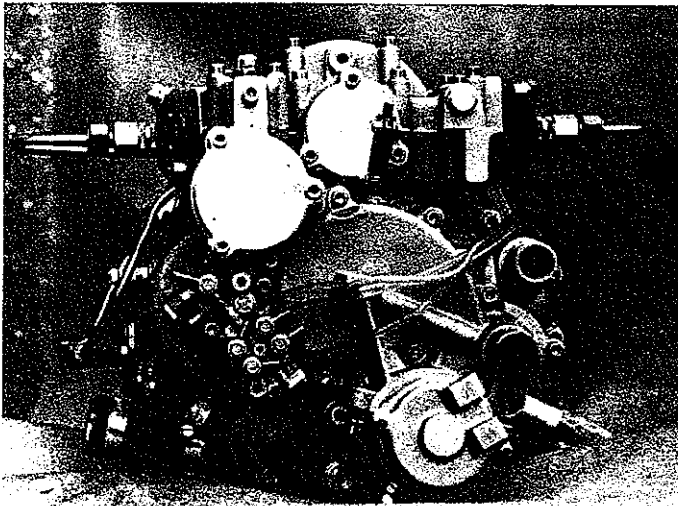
View of accessories housing for the heavy fuel and gasoline 400 series engines
